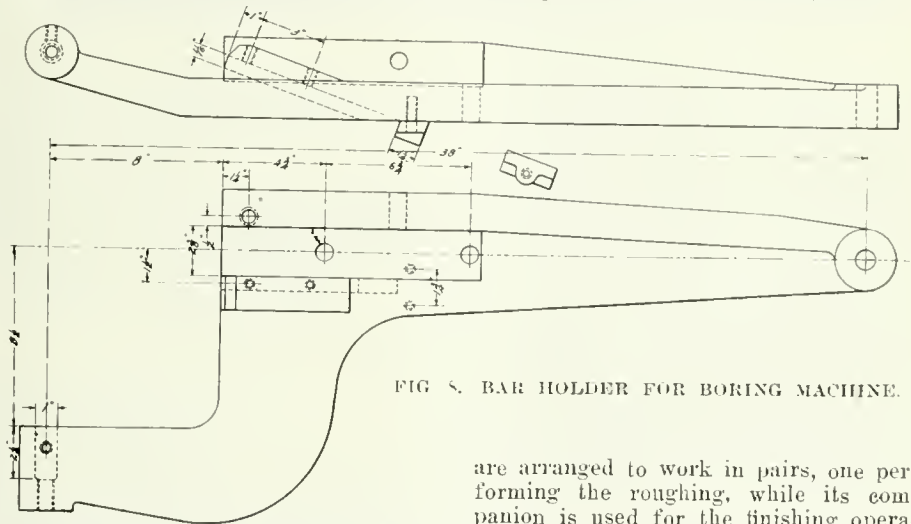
BAR HOLDER FOR BORING MACHINE.
